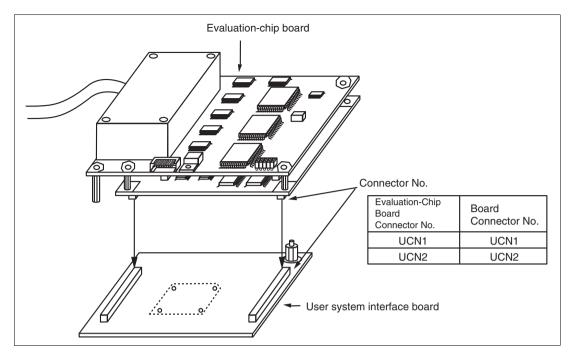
Connecting the User System Interface Board to the Evaluation-Chip Board
